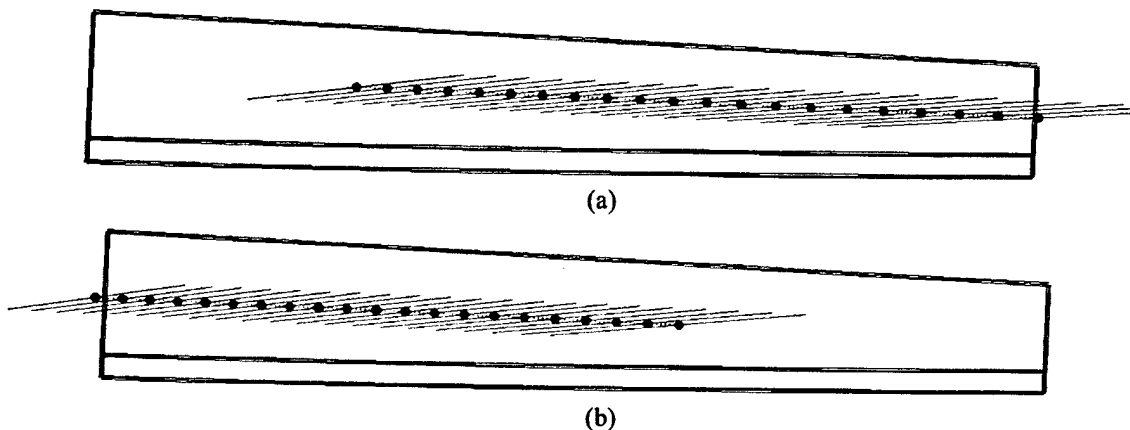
Case of design FTD2: shift of the bearing contact for (a) shortest distance between axes of pinion and gear $\Delta E = -0.04$ mm and (b) shortest distance between axes of pinion and gear $\Delta E = 0.05$ mm.
